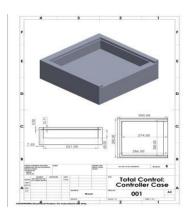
SOLIDWORKS drawing showing the design of the second prototype of total control and its dimensions from a top-down and left-side view. Prototype designed with wood.
